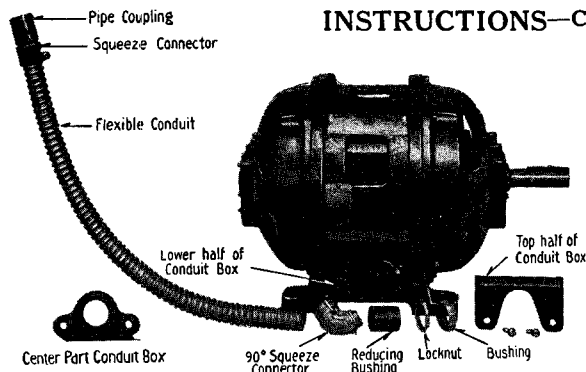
METHOD OF CONNECTING MOTOR TO LINE
